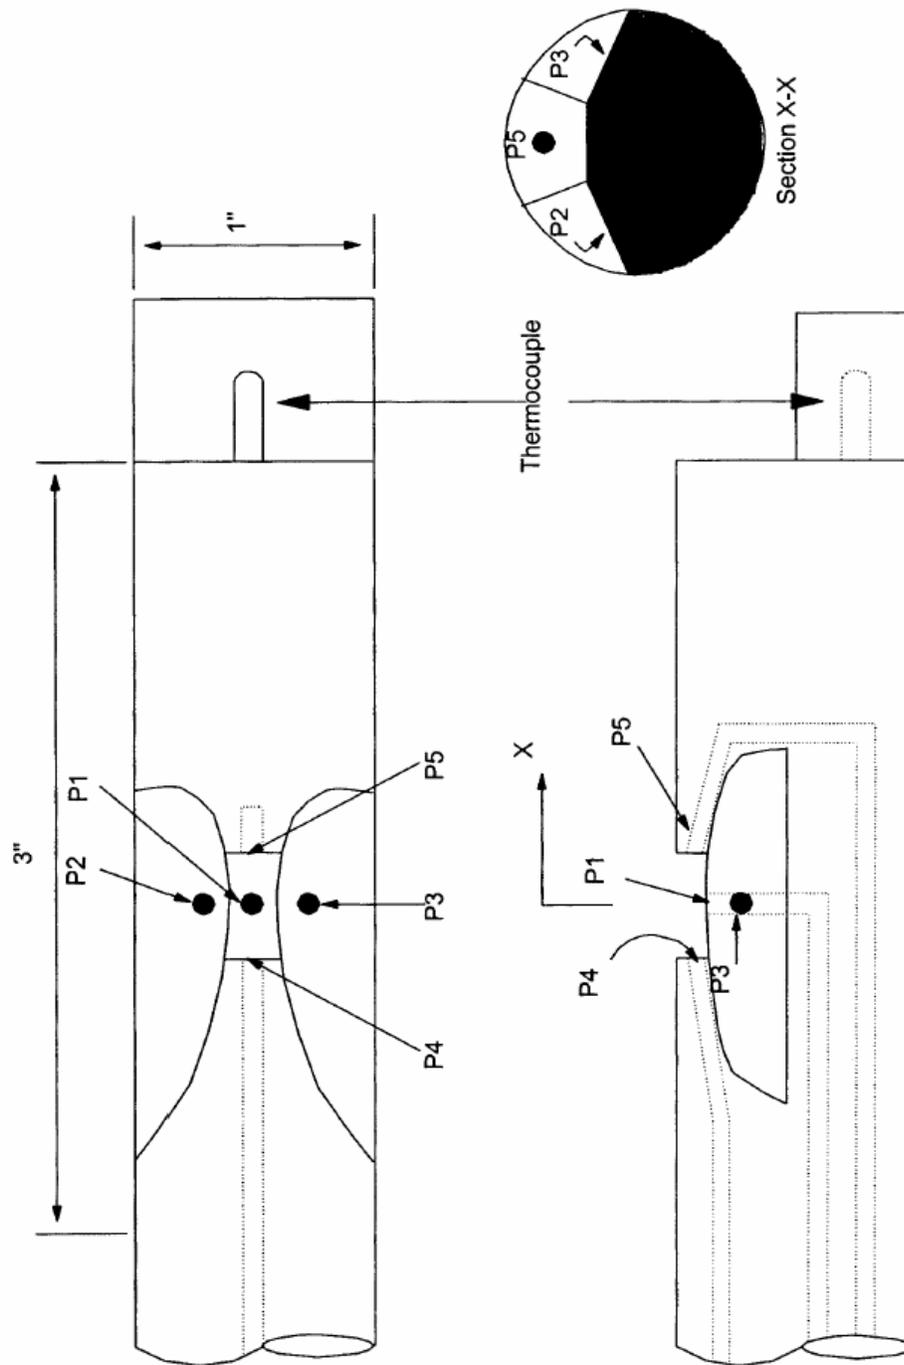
Illustration of a five-hole prism-shaped (DAT) probe.
